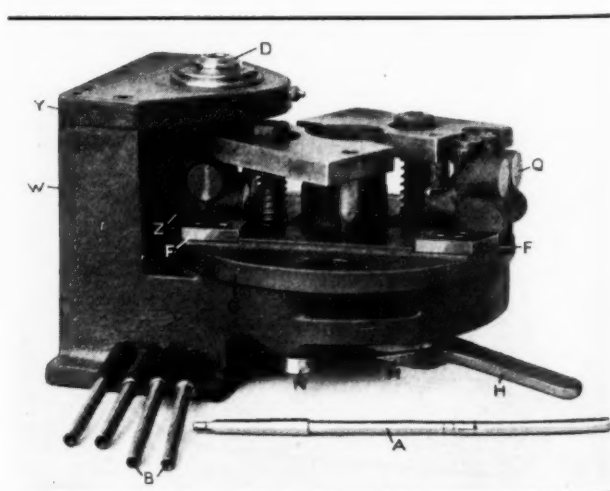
Fixture Used on Drilling Machine for Precision-boring Valve Bodies
